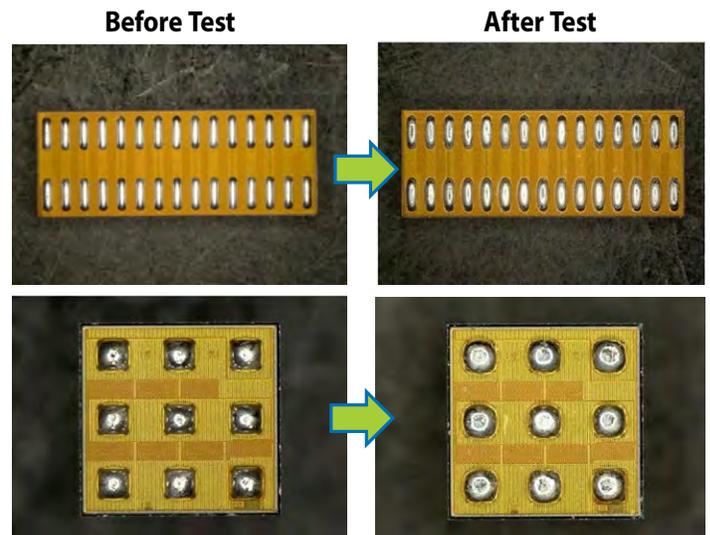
Solder pads for EPC2206 and EPC2214 before and after solderability test. Note that solder paste has been incorporated, leaving a smooth and uniform finish absent of visual defects.
